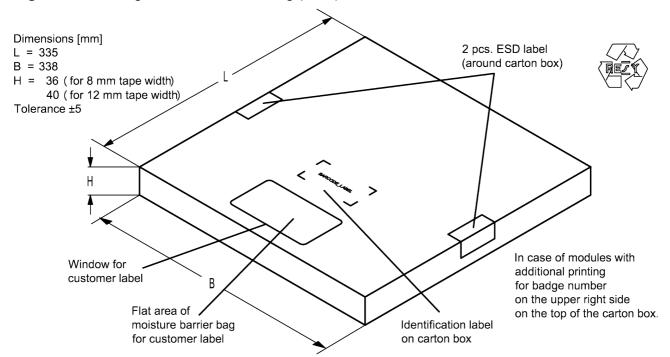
Drawing of folding box for reel with diameter of 330 mm.
